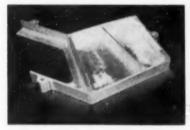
Aircraft contour milled part formerly produced on conventional vertical mill.
